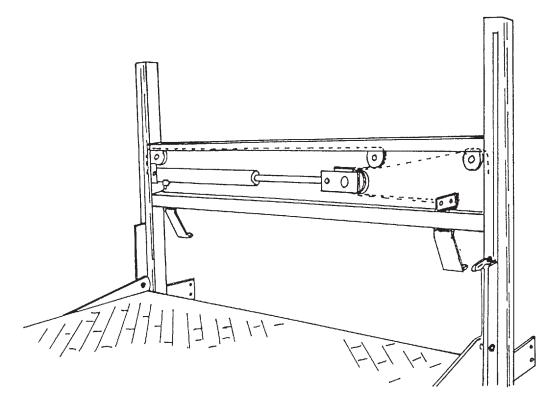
OVERALL VIEW WITH COVER REMOVED
